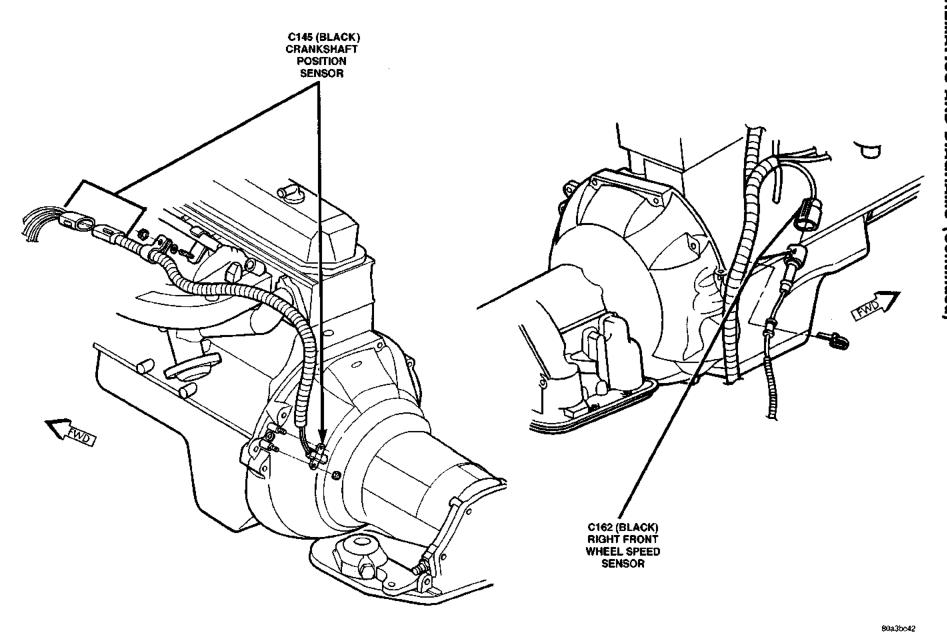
Crankshaft Position Sensor and Right Front Wheel Speed Sensor
